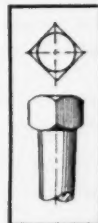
Drawing showing design of highly efficient removable taper pins.
